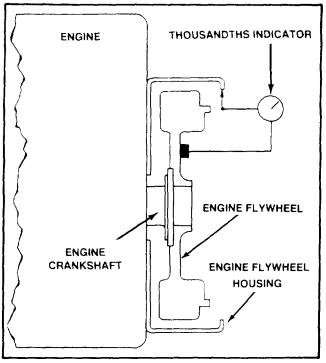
Checking the Bore of the Engine Flywheel Housing
